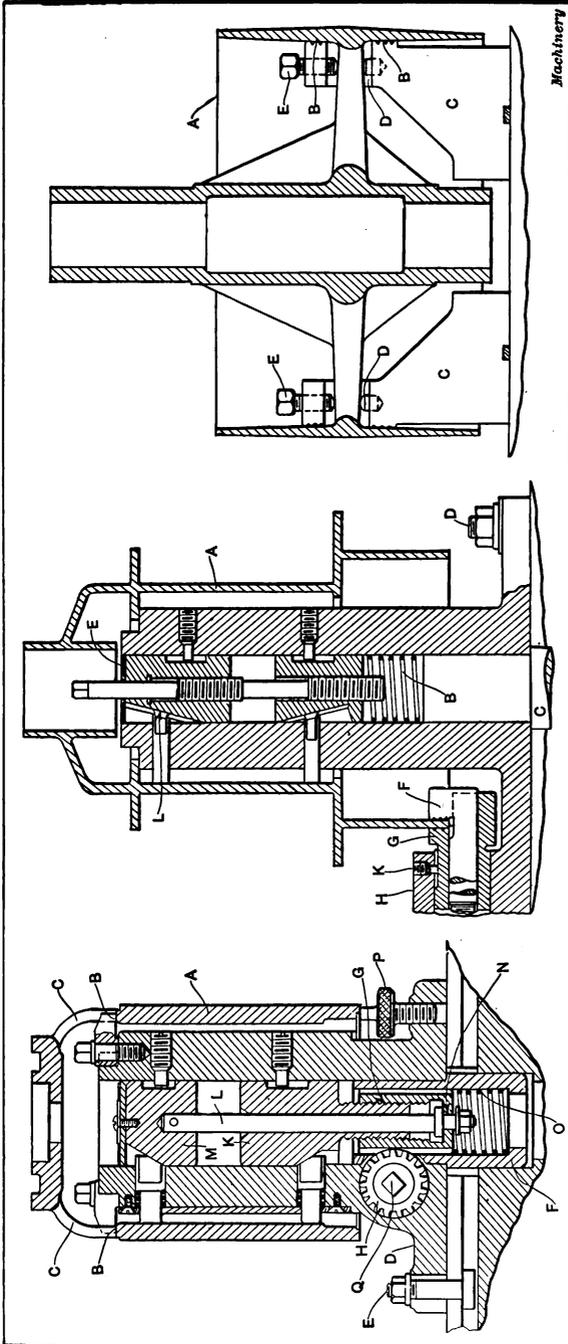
Vertical Boring Mill Fixture for holding Part A internally
